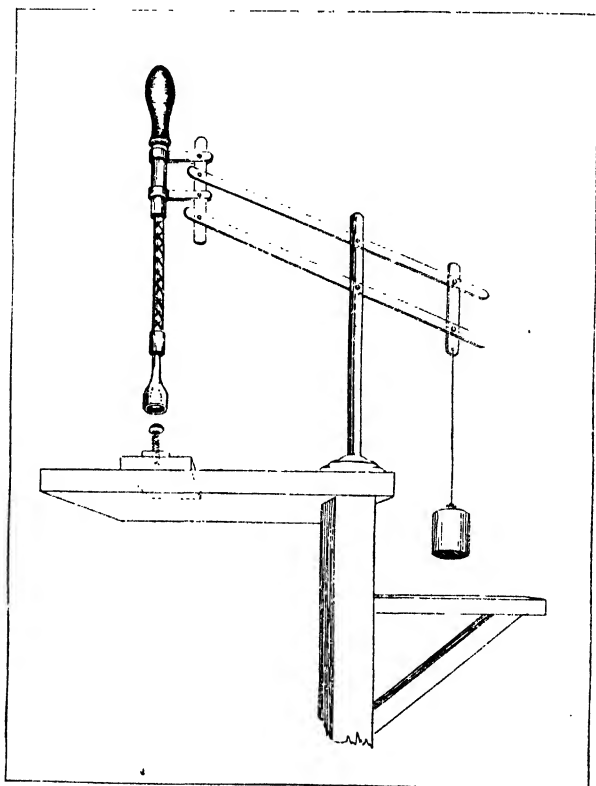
“Pantograph” mounting for spiral screwdriver.
